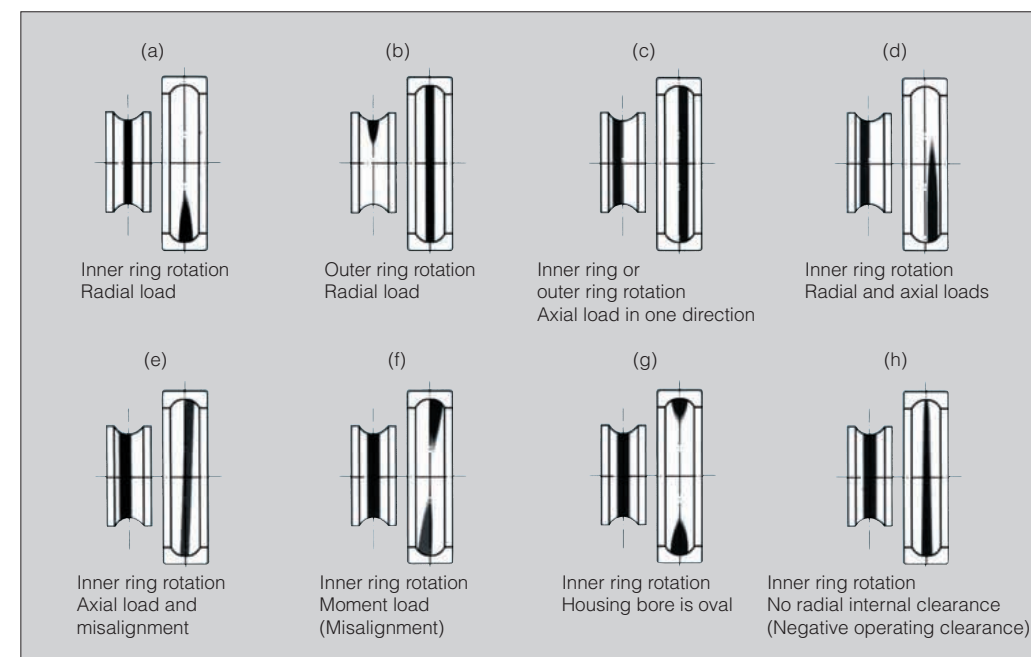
Typical Running Traces of Deep Groove Ball Bearings
